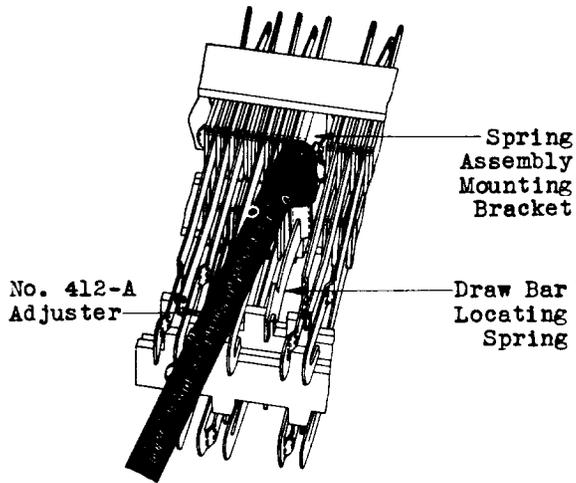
Method of Tensioning Draw Bar Locating Spring
